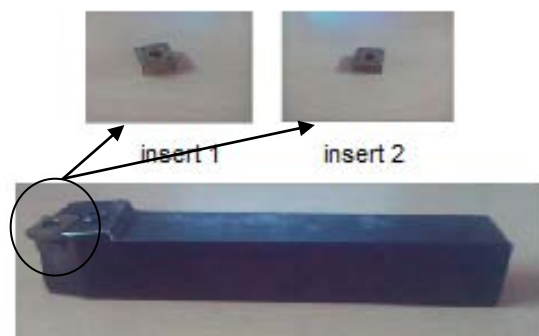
View of tool holder (PSBNR2525M12- type) with square insert (SNMG120408-type), [15].
